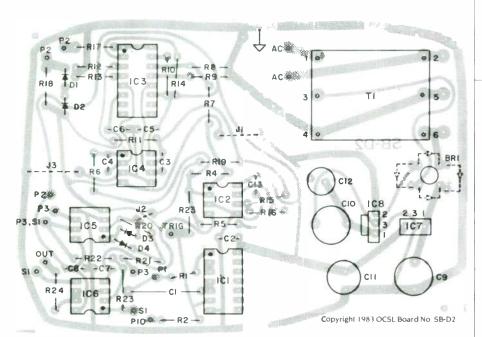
This is the stuffing guide for the SB-D2 circuit board. Note that the transformer T1 has a spare set of holes near the board's edge for a slightly larger board mounted transformer. The author's Signal PC 34-125 fits the closer holes. Signal's PC 34-300 fits the wider ones. BR-1 is a standard full wave bridge, which fits the inner four holes. Extra holes are provided if you prefer to use less expensive IN4001 diodes.
